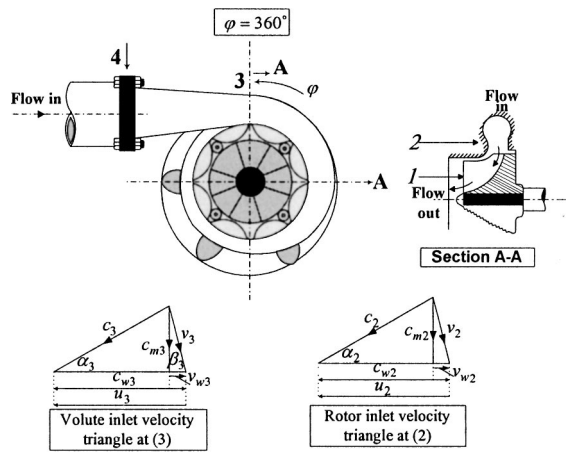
IFR turbine fitted with a single nozzleless volute casing
